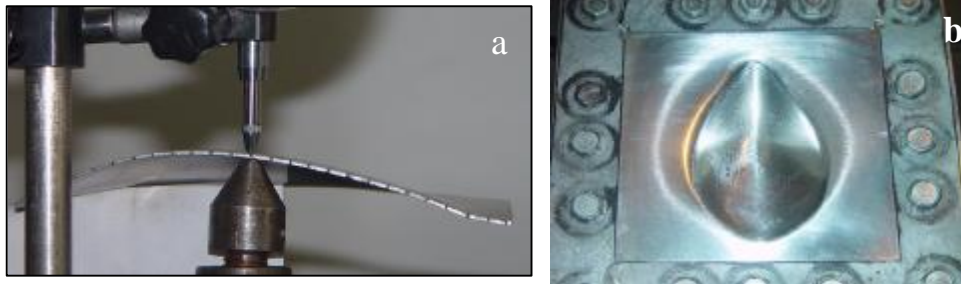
(a) method of measuring thickness,(b) symbol of produced parts
